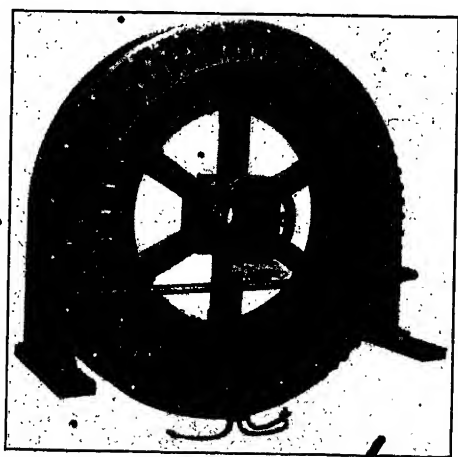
TYPICAL LOW-SPEED SYNCHRONOUS MOTOR STATOR WITH FABRICATED ROTOR IN PLACE
